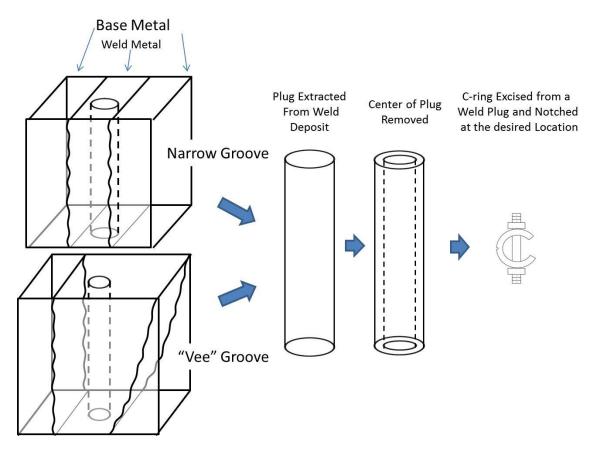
Schematic extraction of C-Ring samples from a narrow gap SAW butt weld and a general "Vee" groove butt weld geometry.
